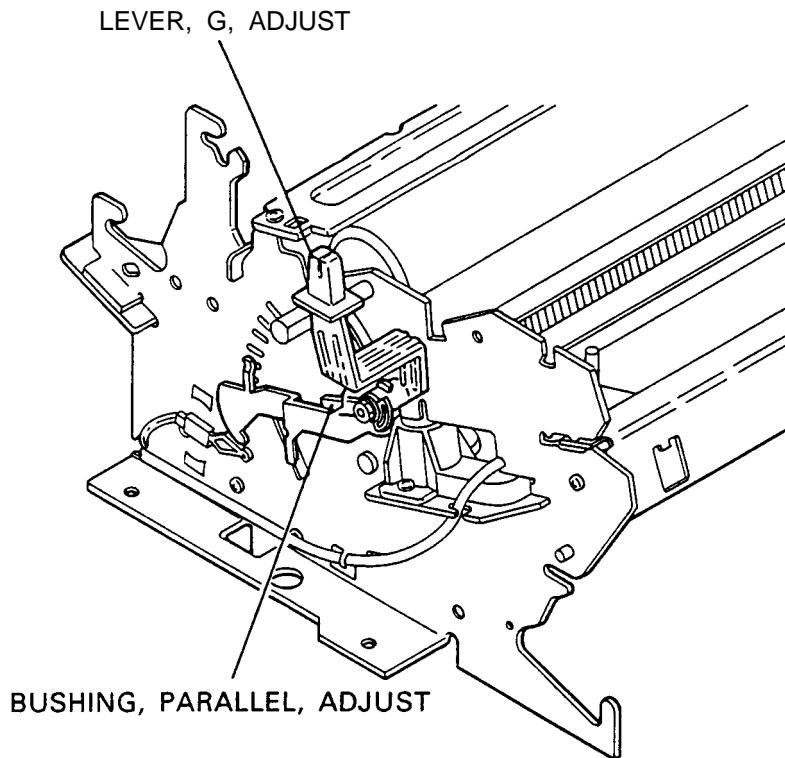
PARALLEUSM ADJUSTMENT BUSHING
